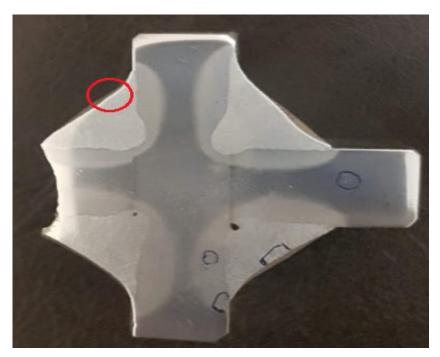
Specimen No. 1. galvanized and non-broken specimen after etching.
